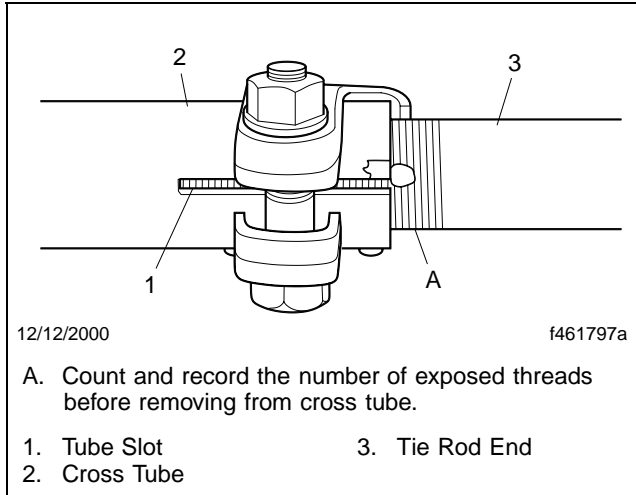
, Bottom View of Tie Rod End and Cross Tube
